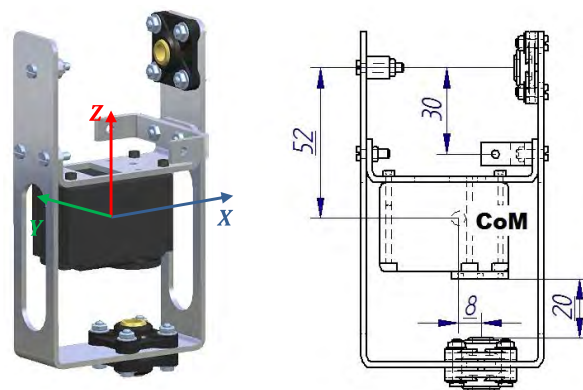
CoM and dimensions (in mm) of the shoulder roll structure.
